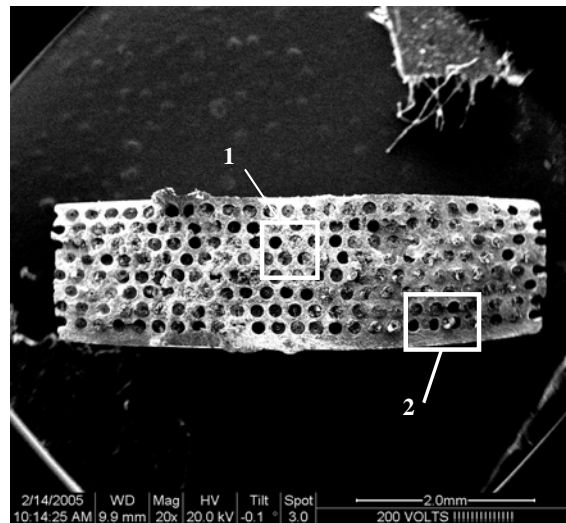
Specimen TMC-04, overall view of fracture surface
